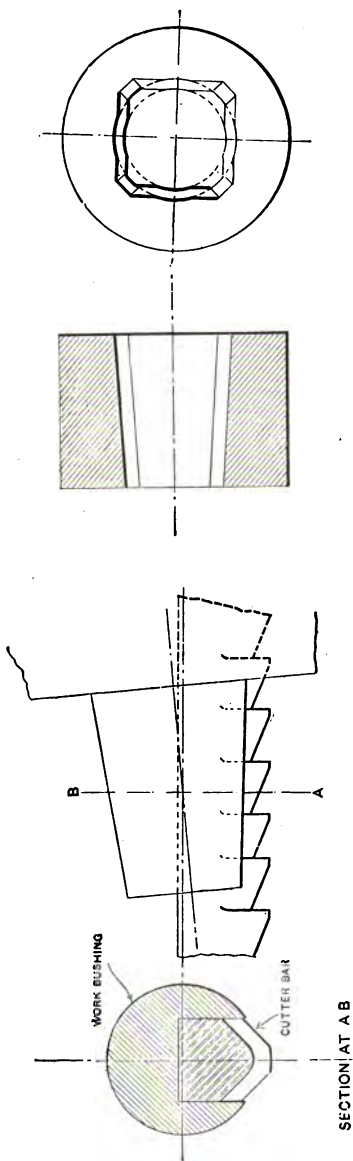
Sectional view of cutter bar in work bushing and shape of tapered square hole when finished.
